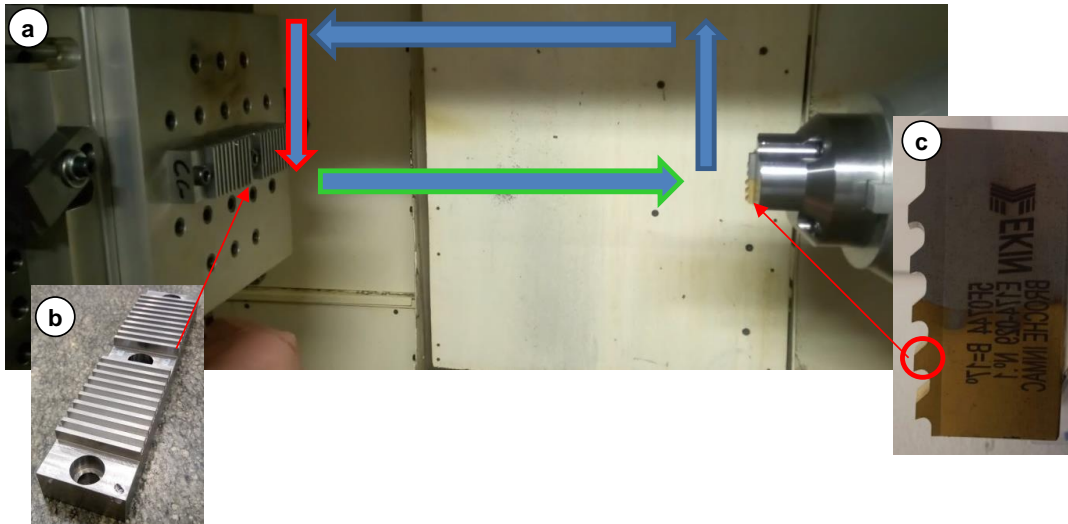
Improvement of the broaching set-up to perform the component oriented tests and wear campaign: a) overview of the set-up, b) material specimen and c) broaching tool.
